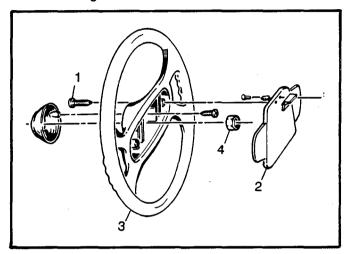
FIG. D-I STEERING WHEEL & SCORECARD HOLDER
